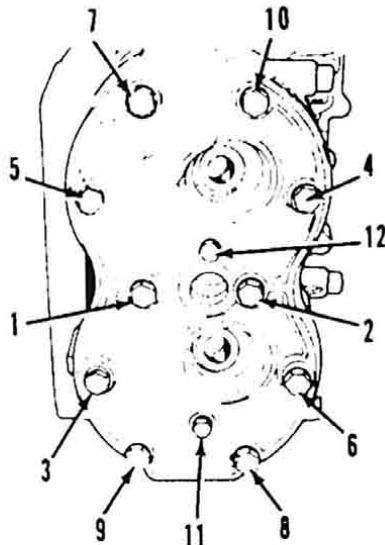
Tighten cylinder head screws in sequence shown. Refer to CONDENSED SERVICE DATA for screw torques.
